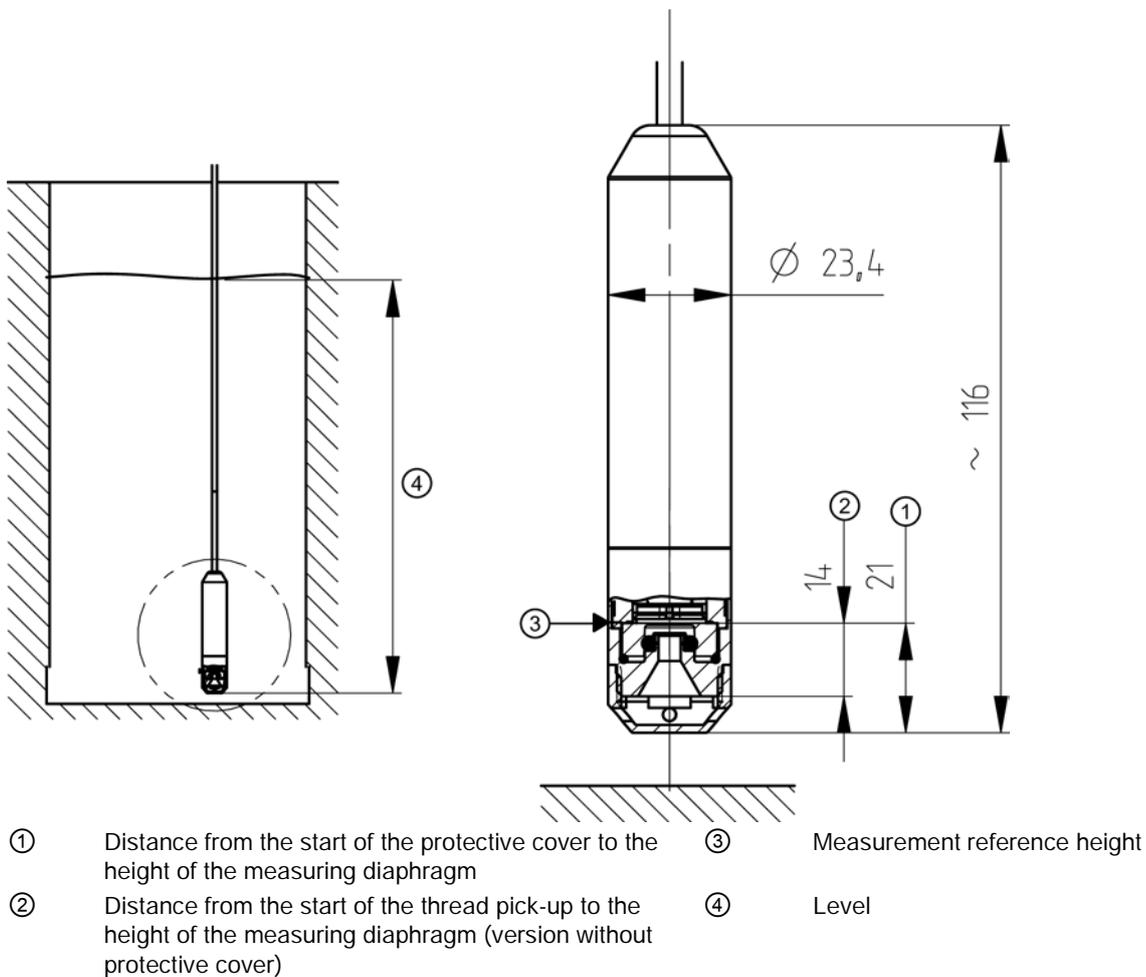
Mounting the pressure transmitter, dimensions in mm
